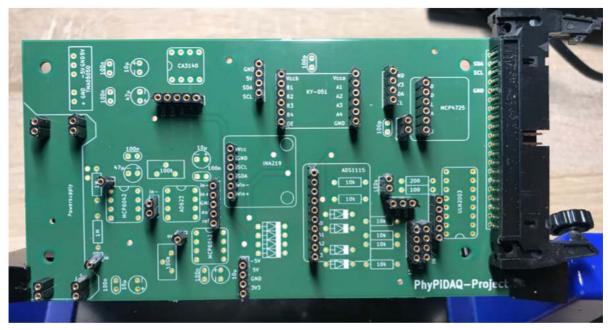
Soldering, step 3: The other components are soldered on. The four devices marked in red are released
